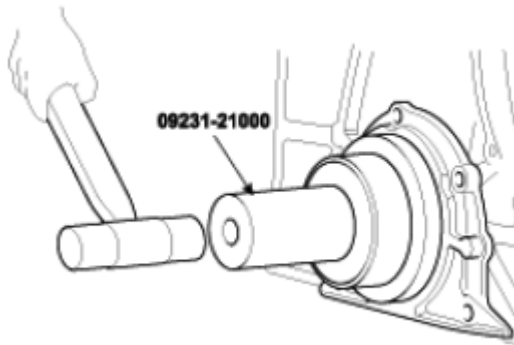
Tapping Oil Seal Using SST (09231-21000) And Hammer
